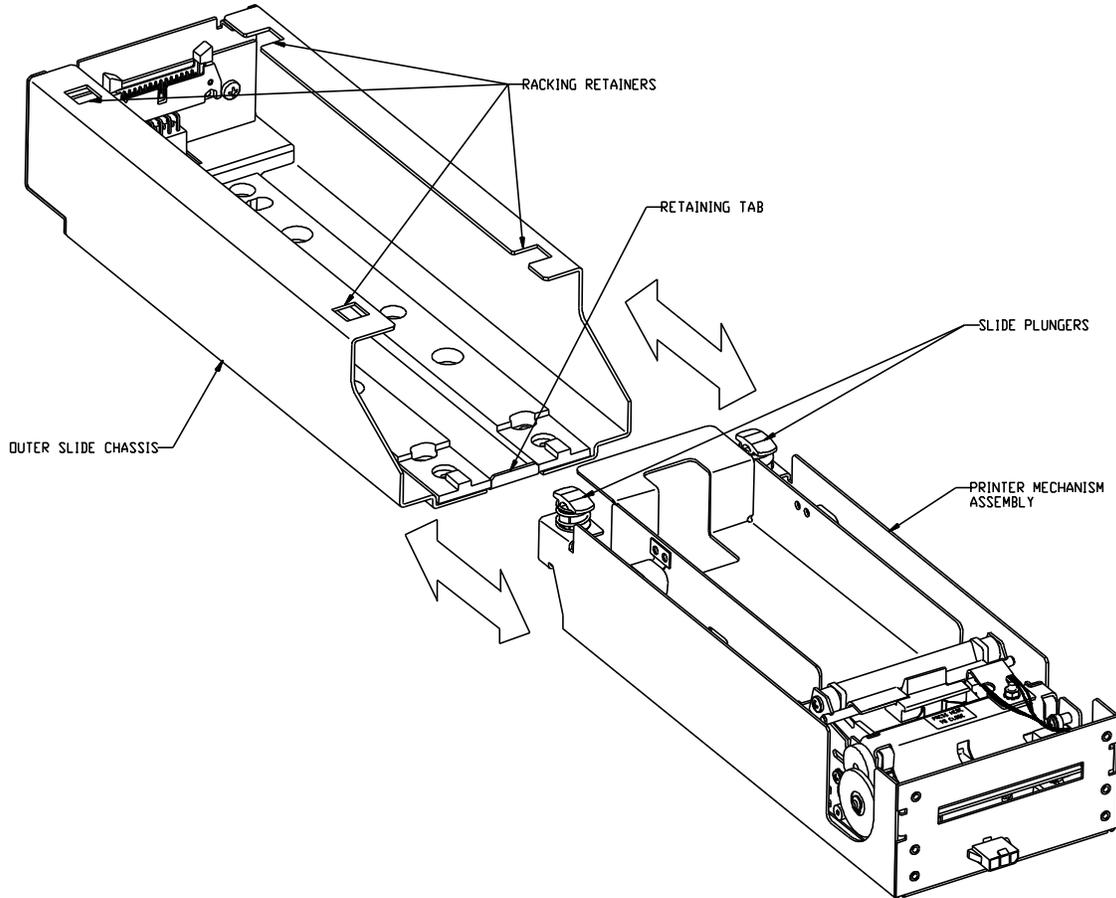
Racking/Unpacking the Printer Mechanism Assembly
